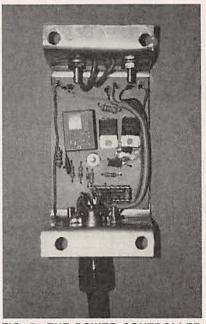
THE POWER-CONTROLLER board is mounted on a 0.064-inch aluminum plate bent into a U-shaped frame. The DIN socket and the terminal strip are mounted on the sides of the U-bracket.
